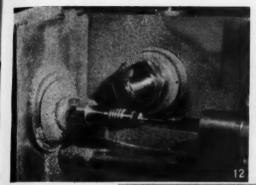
Milling the teeth in the barrel, Fig. 13 (Above)—Watch barrel, enlarged approximately four times. (Below)—Pinions, actual size and as enlarged. Fig. 14—Bench turret lathe, with which a 0.0072-in. hole is drilled and reamed in the hub of the escape wheel.
